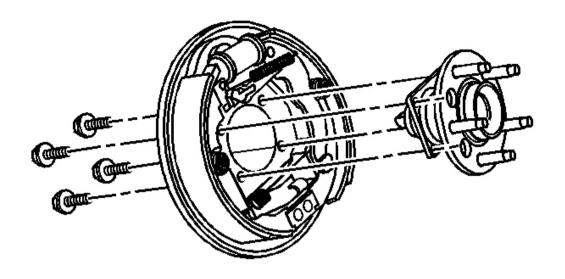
Removing/Installing Wheel Bearing/Hub Assembly Courtesy of GENERAL MOTORS CORP.
